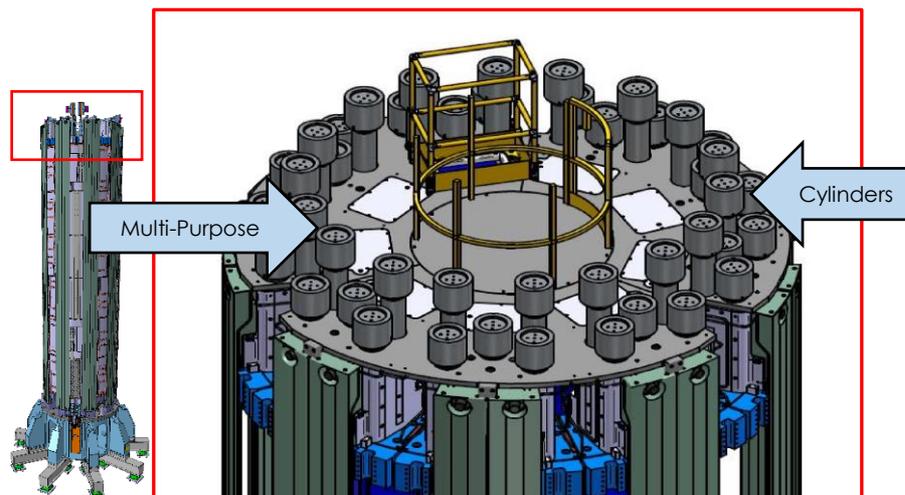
45 Hydraulic Cylinders Installed on CS Assembly
